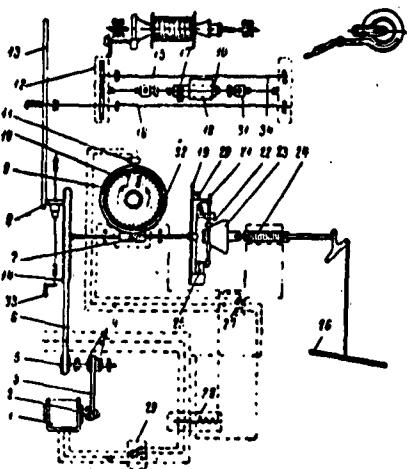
Schematic diagram of the winding machines with a rotating stator.
